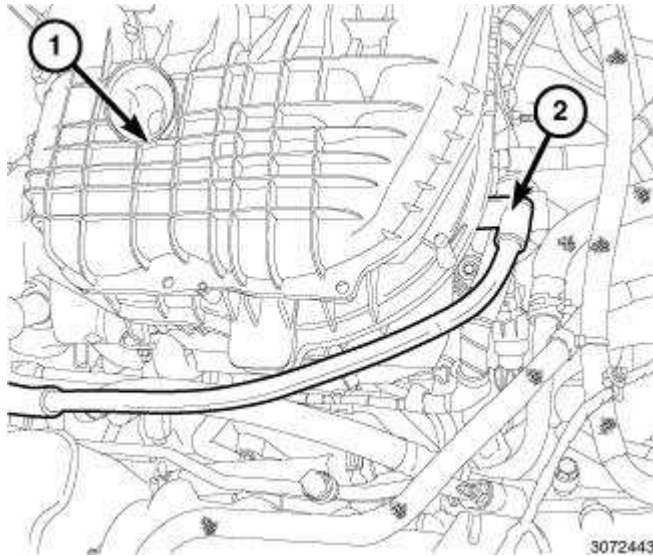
Fresh Air Makeup Hose At Rear Of Intake Manifold
